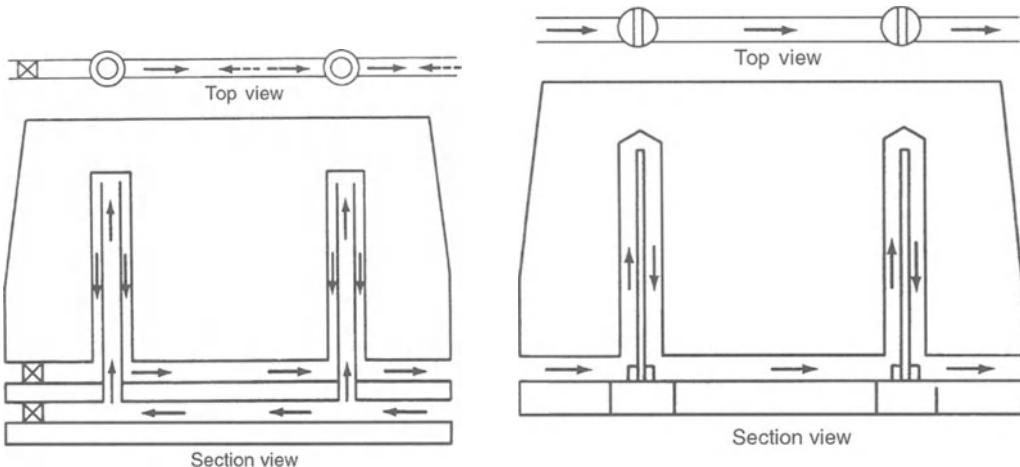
Bubbler for cooling parts such as pins, cores, and deep draw areas.
